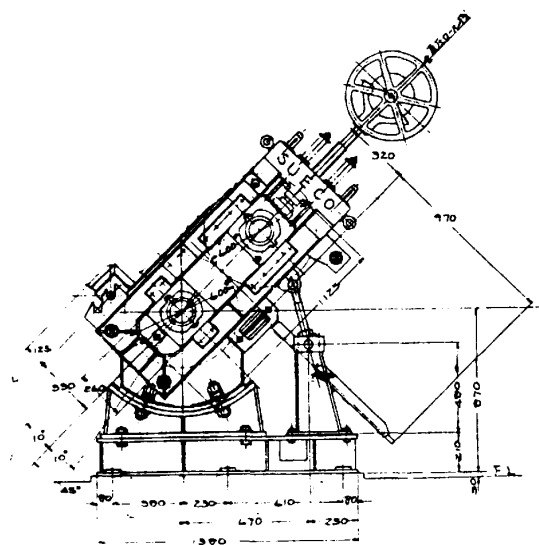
Double roll continuous casting machine. (Designed by Kasakawa)
